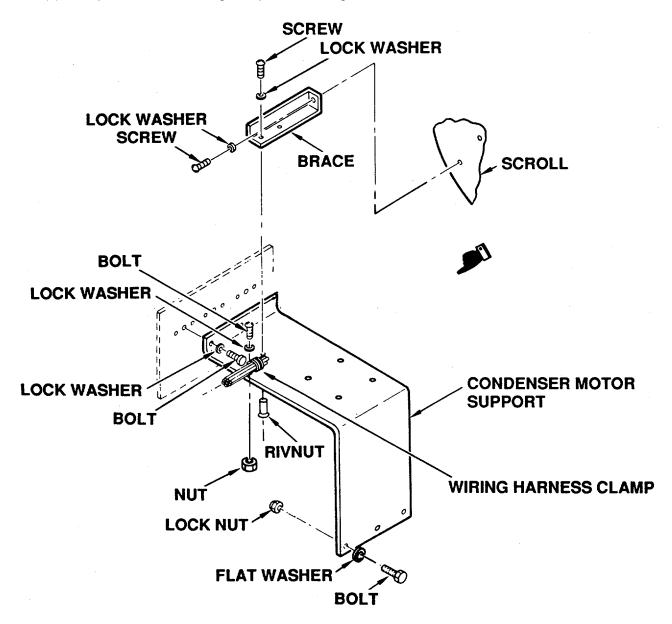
Condenser Motor Support and Brace Removal/Replacement
